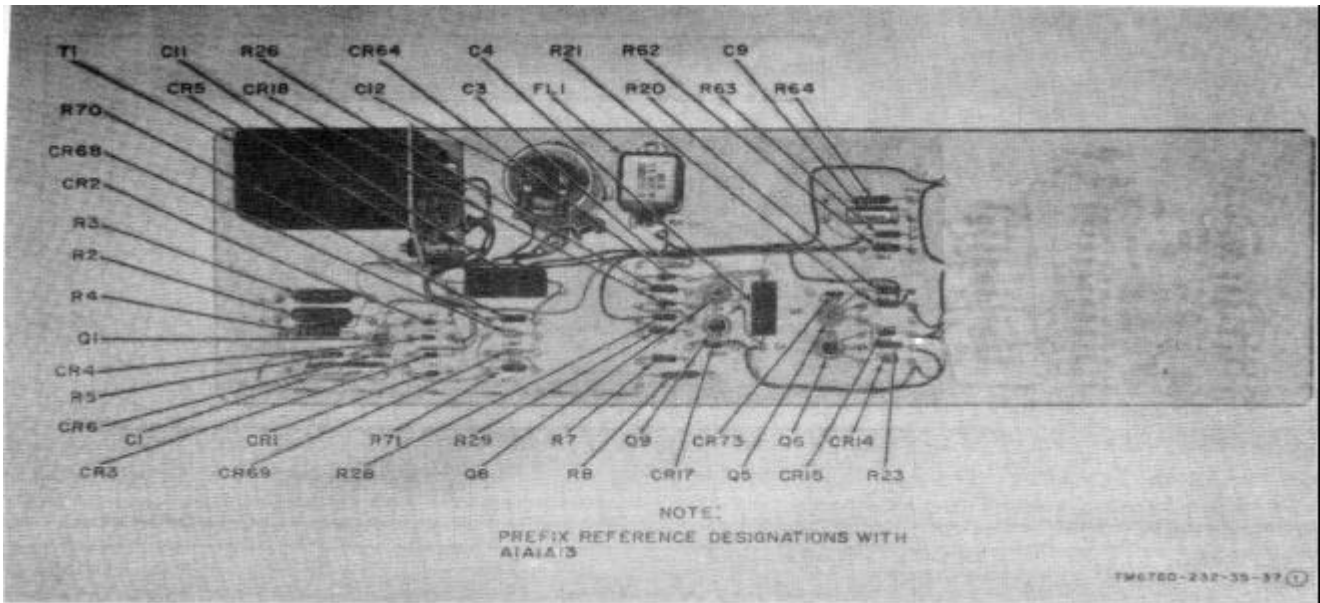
(1). Power chassis and component assembly A1A1A13, location of parts, (part 1 of 2).
